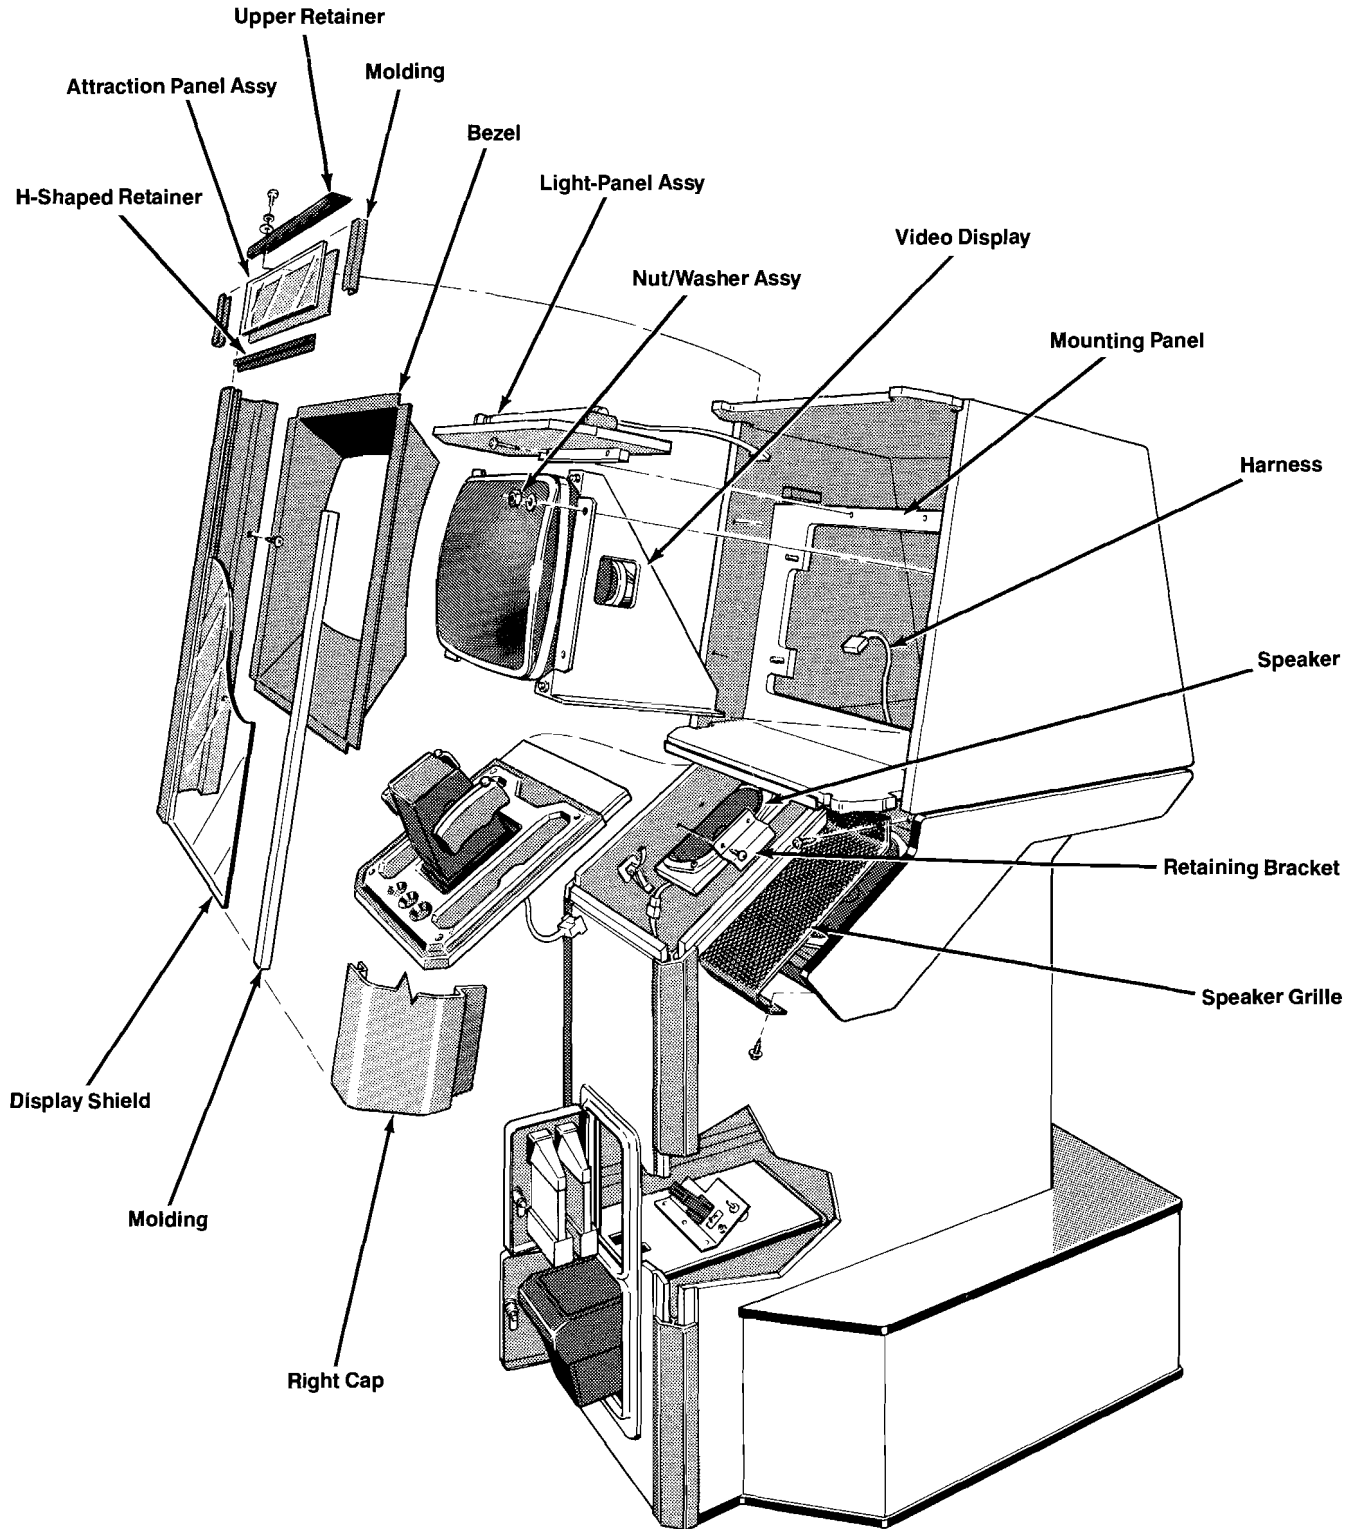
Removing the Video Display and Light-Panel Assembly
